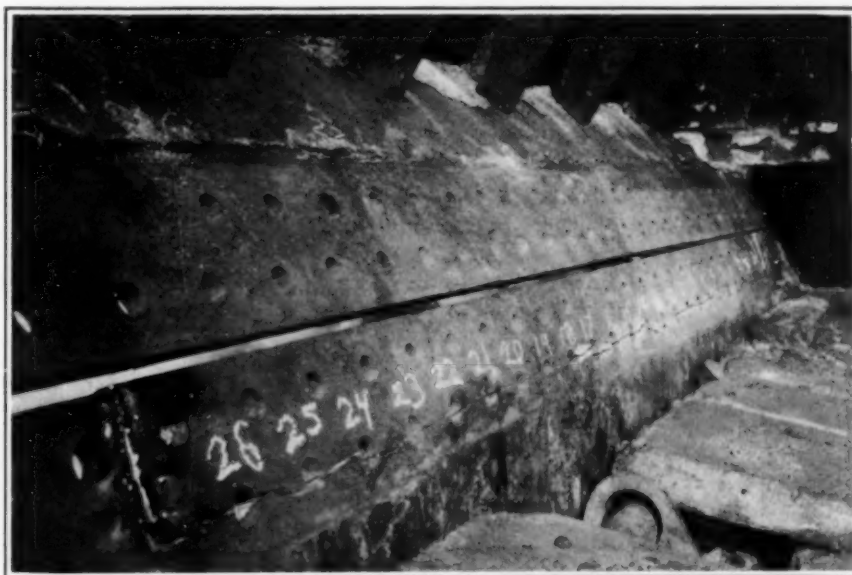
Outside of an Embrittled Drum from Champaign, Ill., Cracked for 26 Rivets
